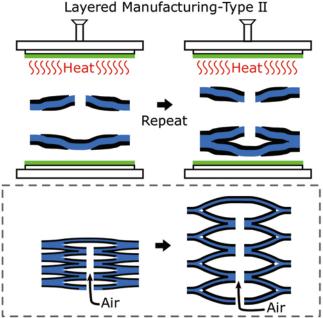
Assembly of the pieces for the second type of manufacturing.
